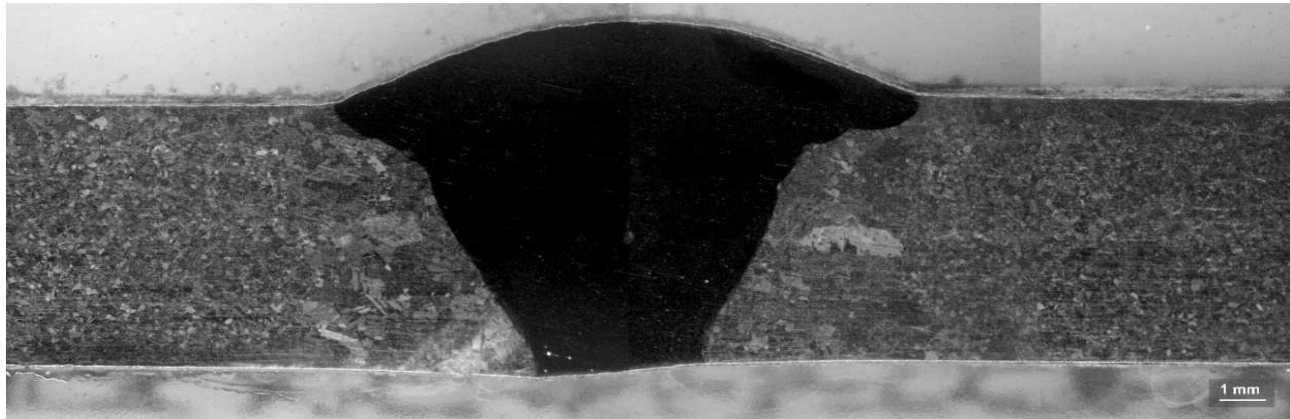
LOM-BF image of the cross-sectional structure of the X6CrNiNbN 25-20 welded tube after PWHT
